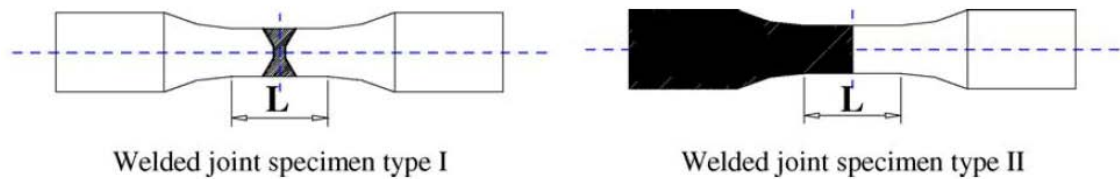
Welded joint specimen used in the literature (Madi et al., 2004)
